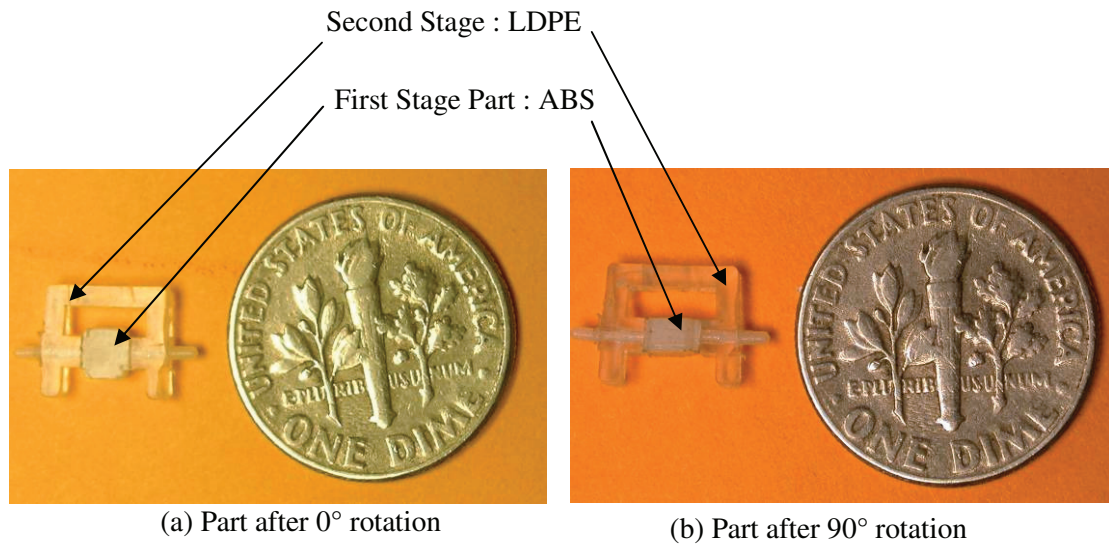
Two configurations of the in mold assembled mesoscale revolute joint demonstrating rotation of the joint
